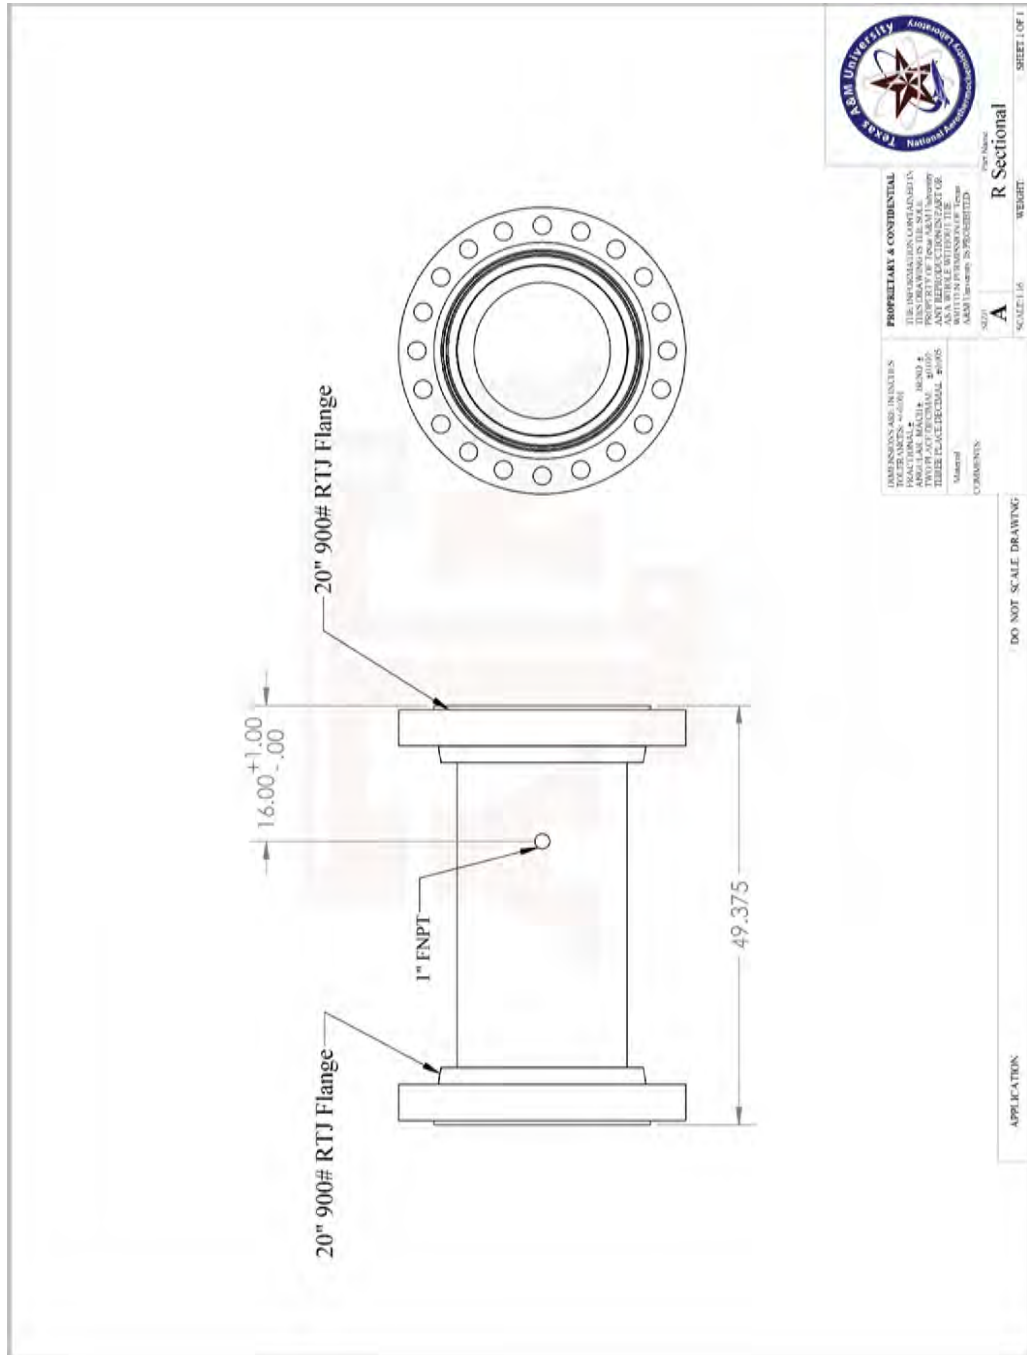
DRIVER SECTION DRAWING SUBMITTED TO CIRCLE H MANUFACTURING FOR ASME CERTIFIED HIGH PRESSURE WELDING.
